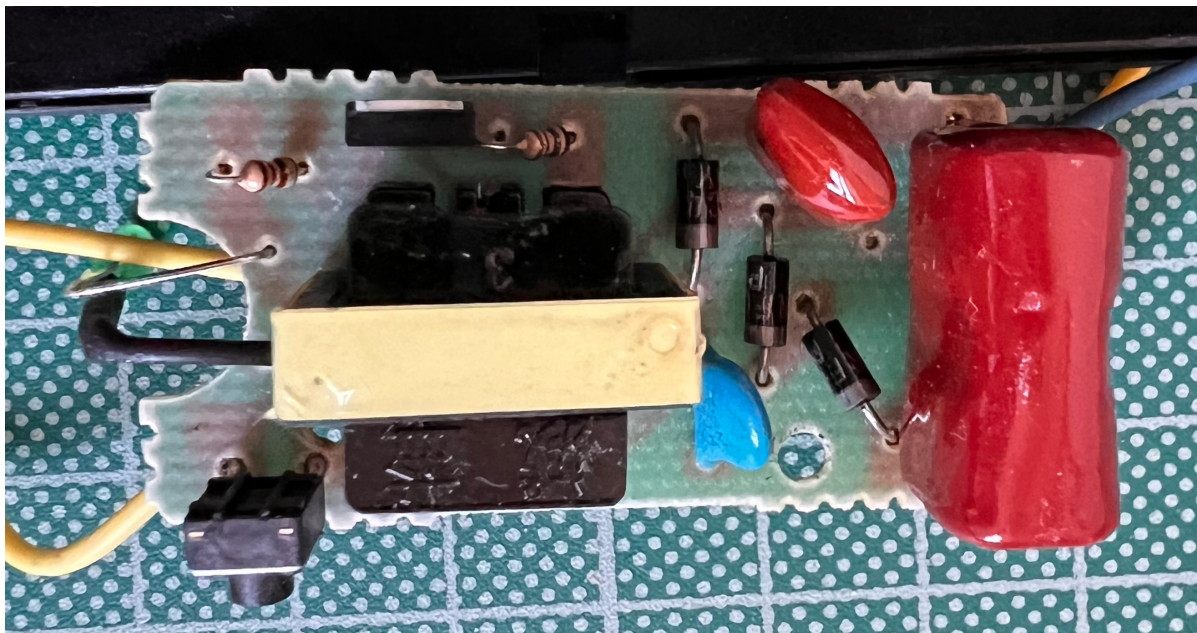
Printed Circuit Board (PCB) of the commercial zapper device.
